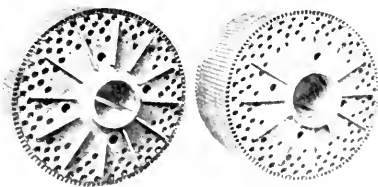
HALVES OF CONVERTER ROTOR CORE
